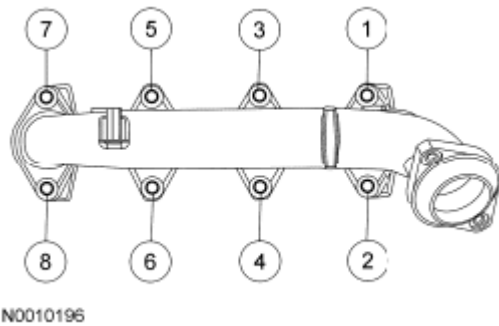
Identifying Exhaust Manifold Nuts Tightening Sequence
